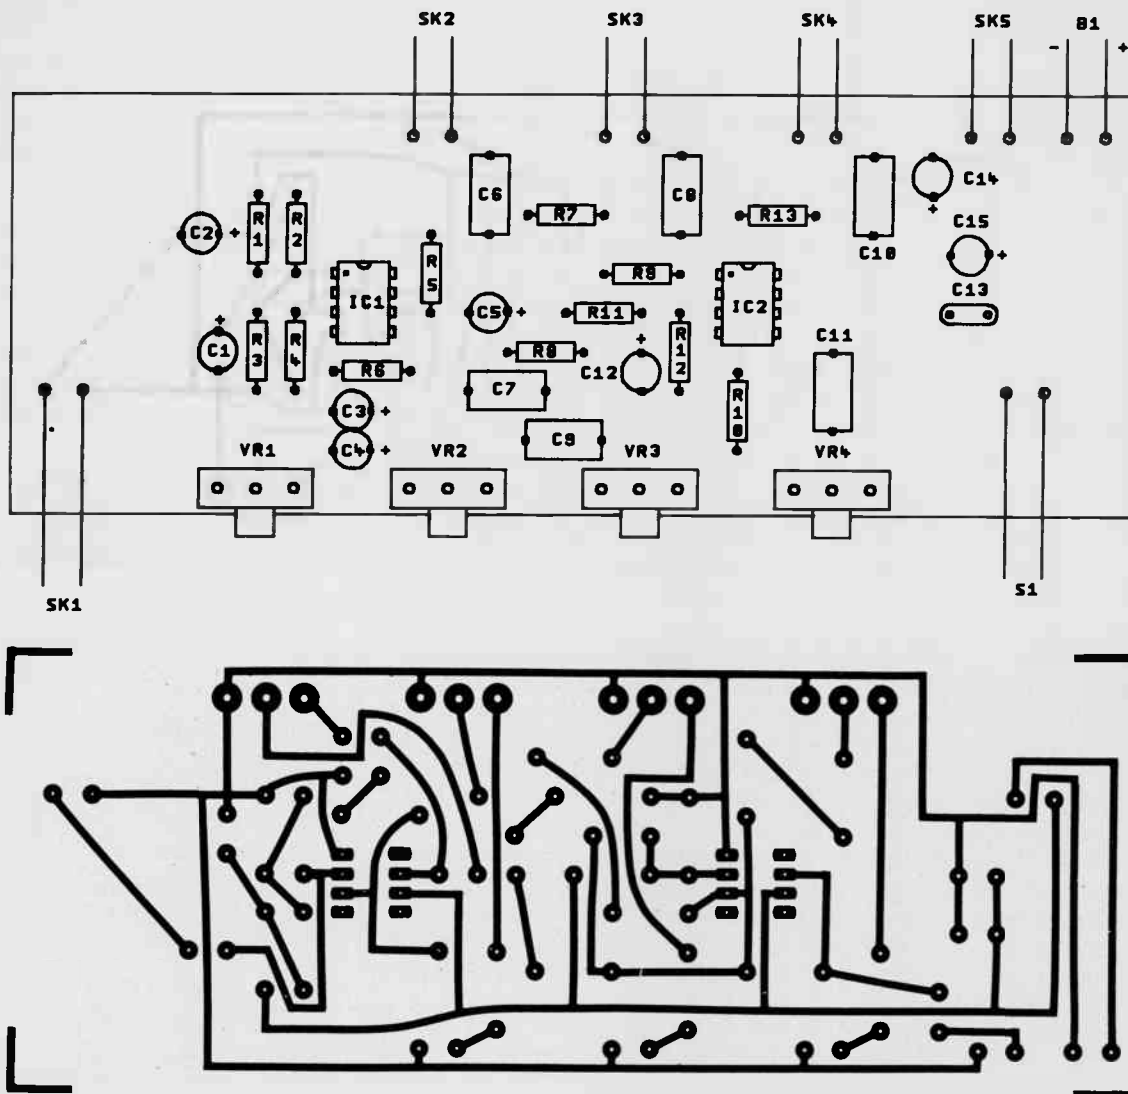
Parts overlay and wiring details (top) and PCB layout.
